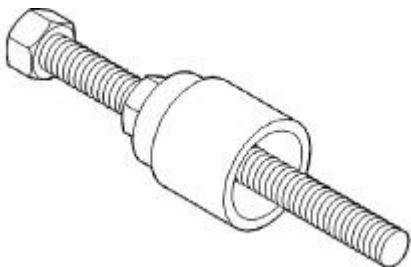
Crankshaft Damper/Sprocket Installer 6792
